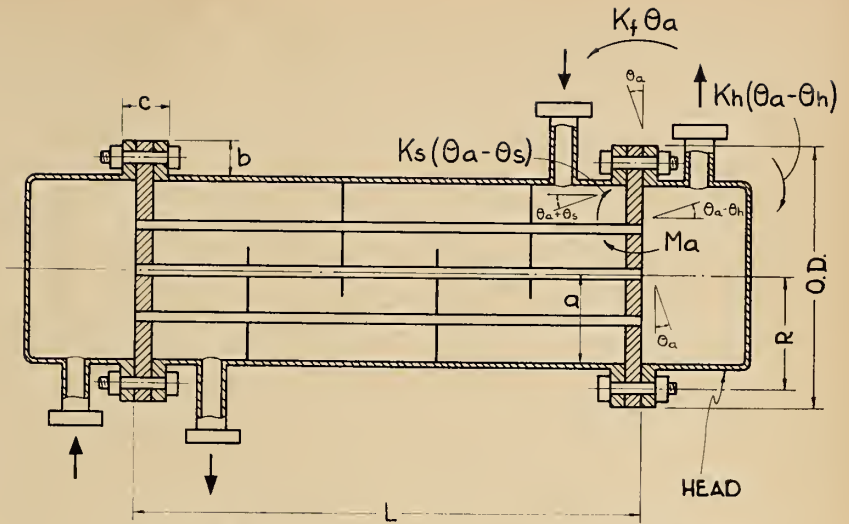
Cross Section of Fixed Tube Sheet Heat Exchanger.
